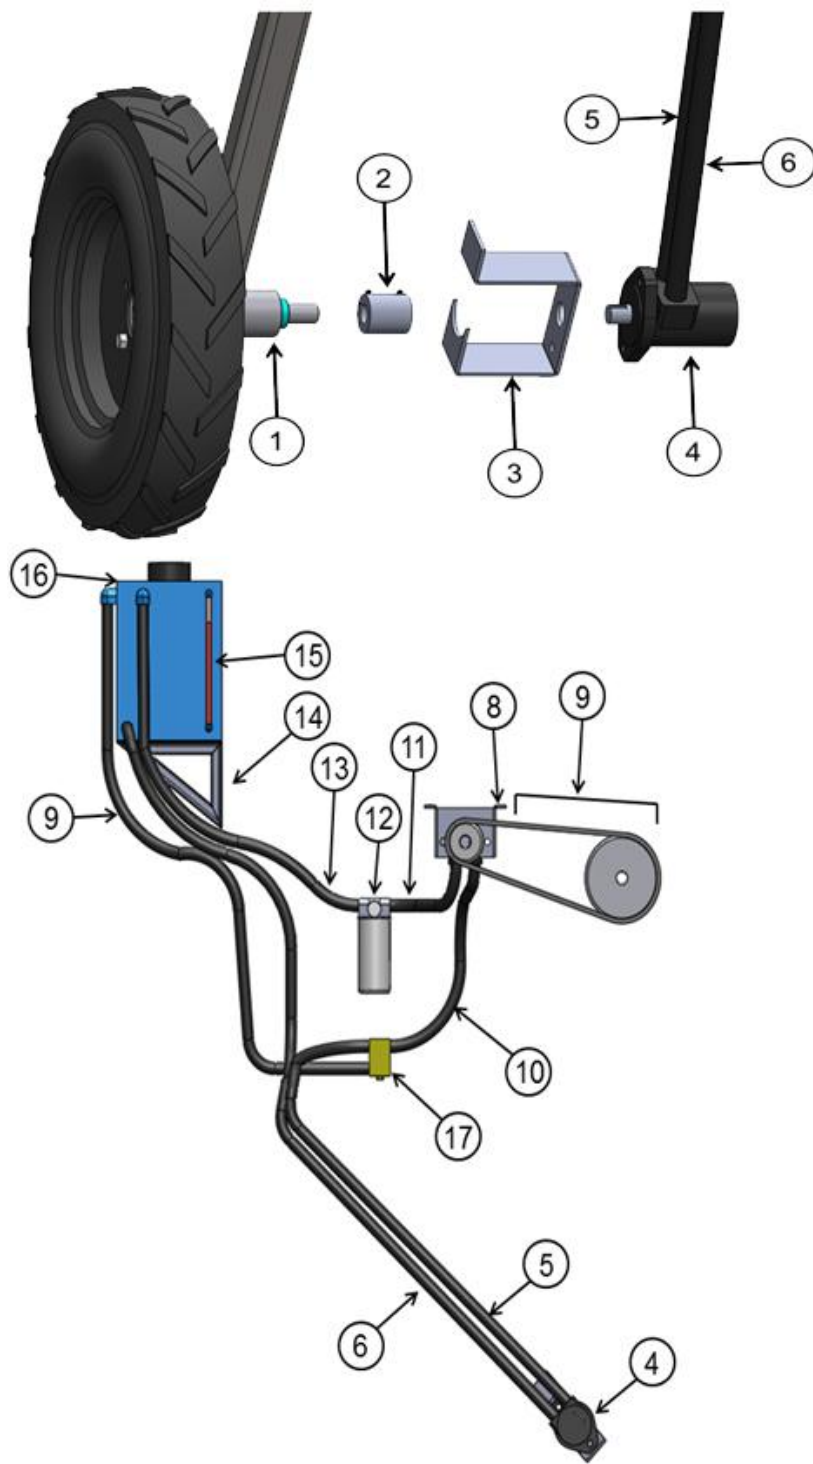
Hydraulic drive itemized assembly. Image credit: Patrick Lessard
